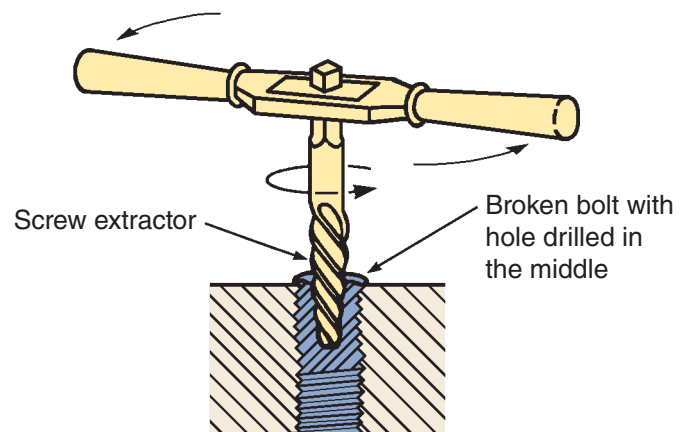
Using a screw extractor to remove a broken bolt.
